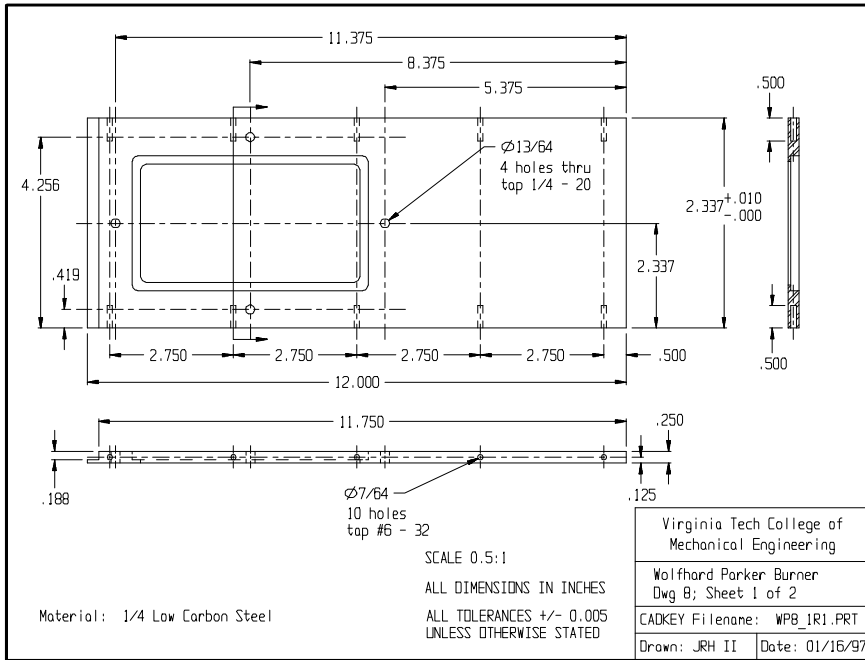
Burner Surround East and West Walls, Drawing 8 Sheet 1 of 2
